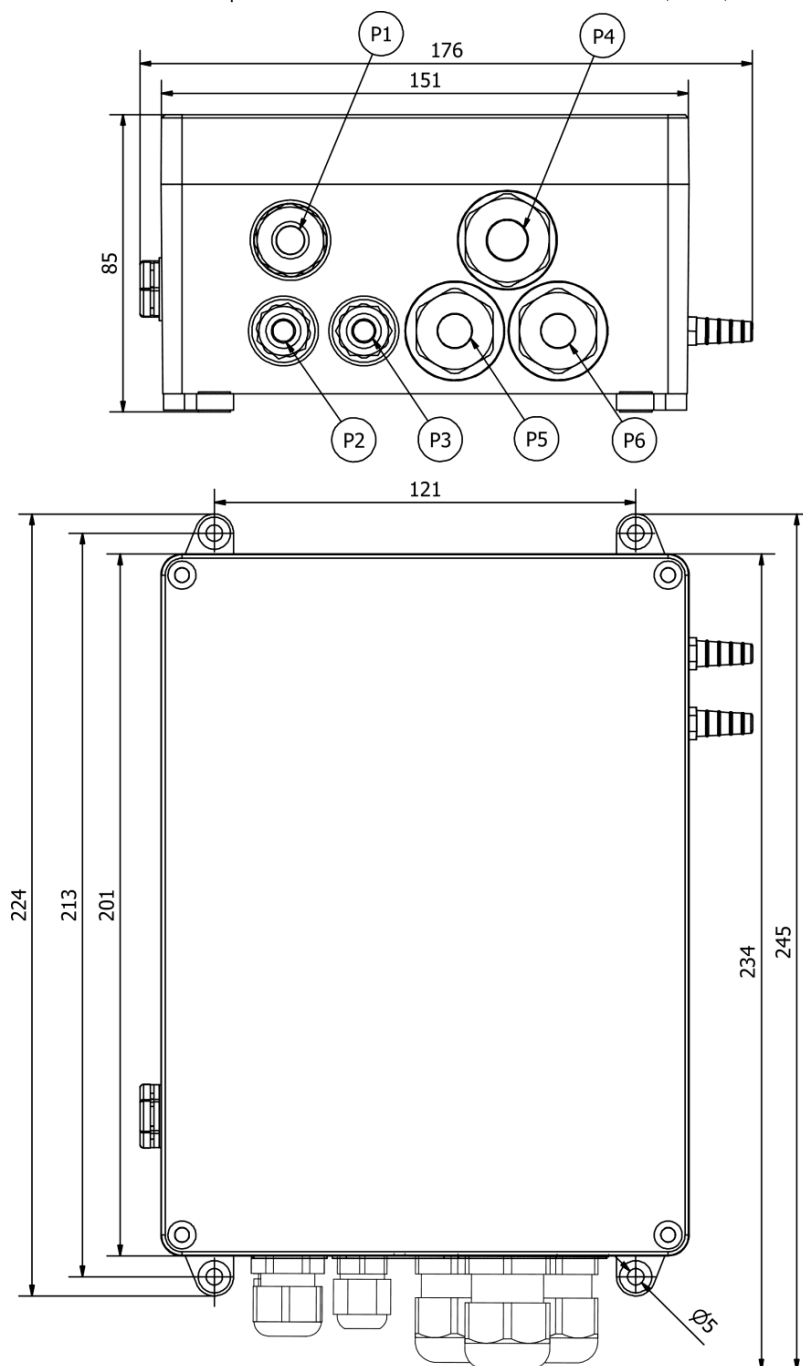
MAC-D Min controller in IP65 enclosure (version 2) - dimensions.
